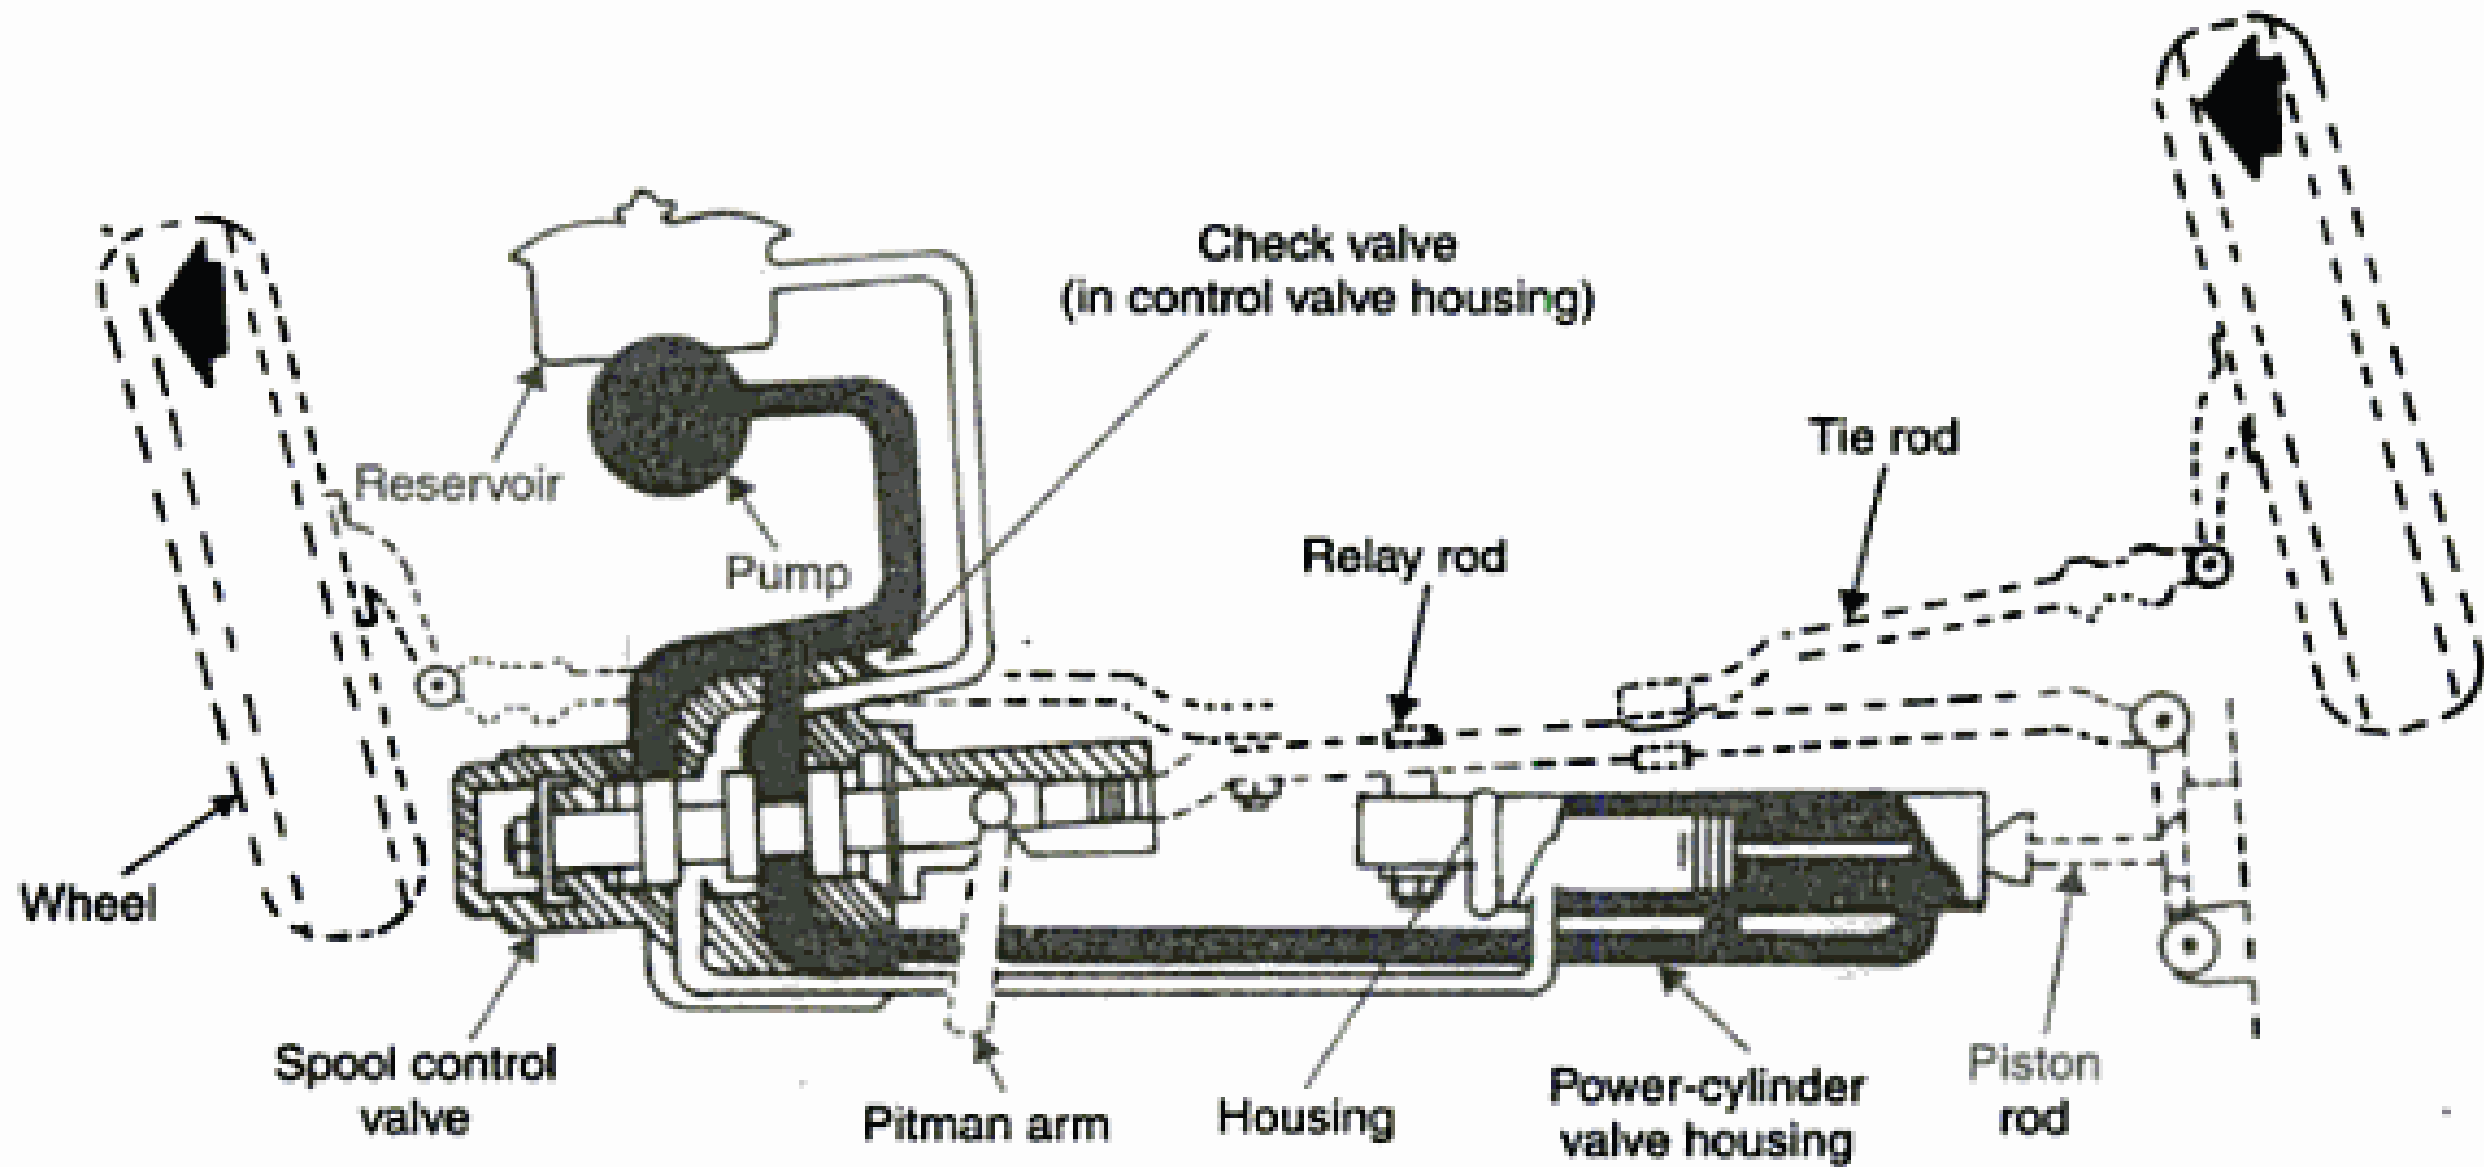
Linkage power steering (Ford Motor Co.)
